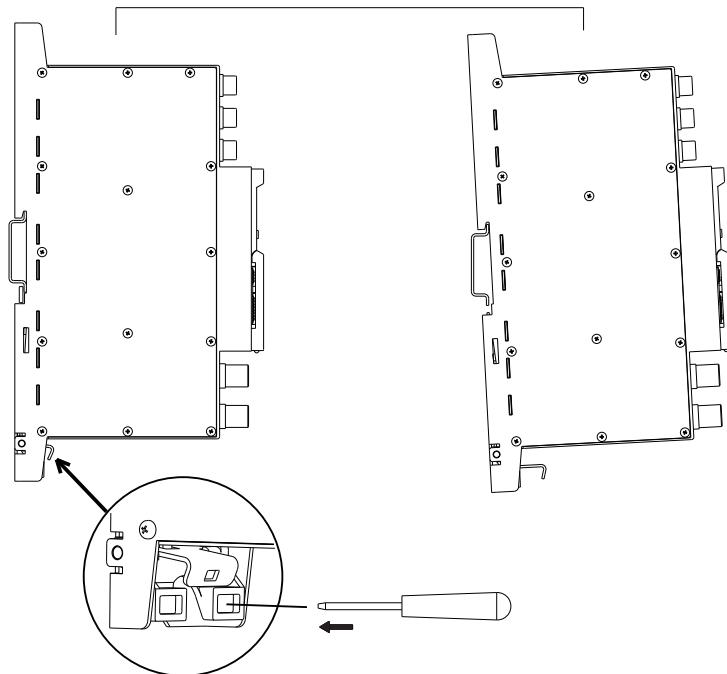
Mounting from DIN rail / Демонтаж с планки "DIN rail" / Montaggio su barra DIN
